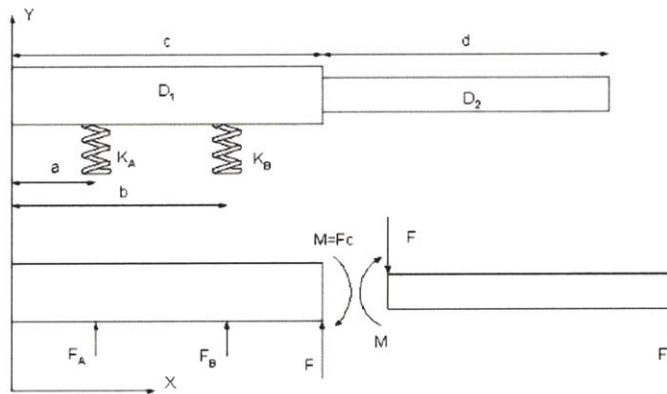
Stepped shaft model of the ball-screw spline supported at its front end by air bearings, where radial displacement from the nut closest to the air bearings is applied to the end of shaft segment D_2 .
